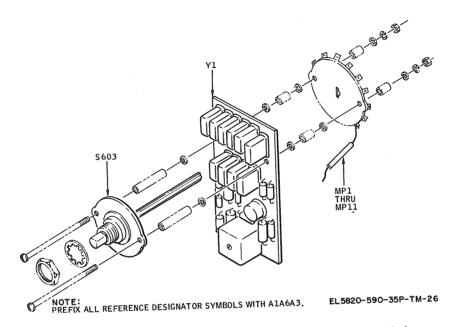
Frequency synthesizer module, switch A3 disassembly.
